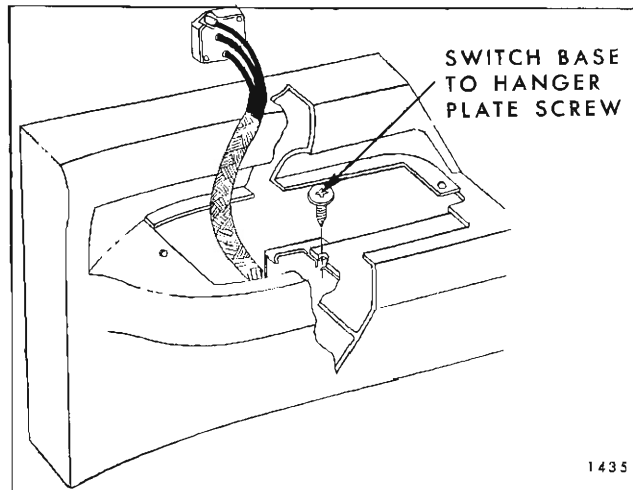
D19—Door Trim Pad Removal - 68200 Series
